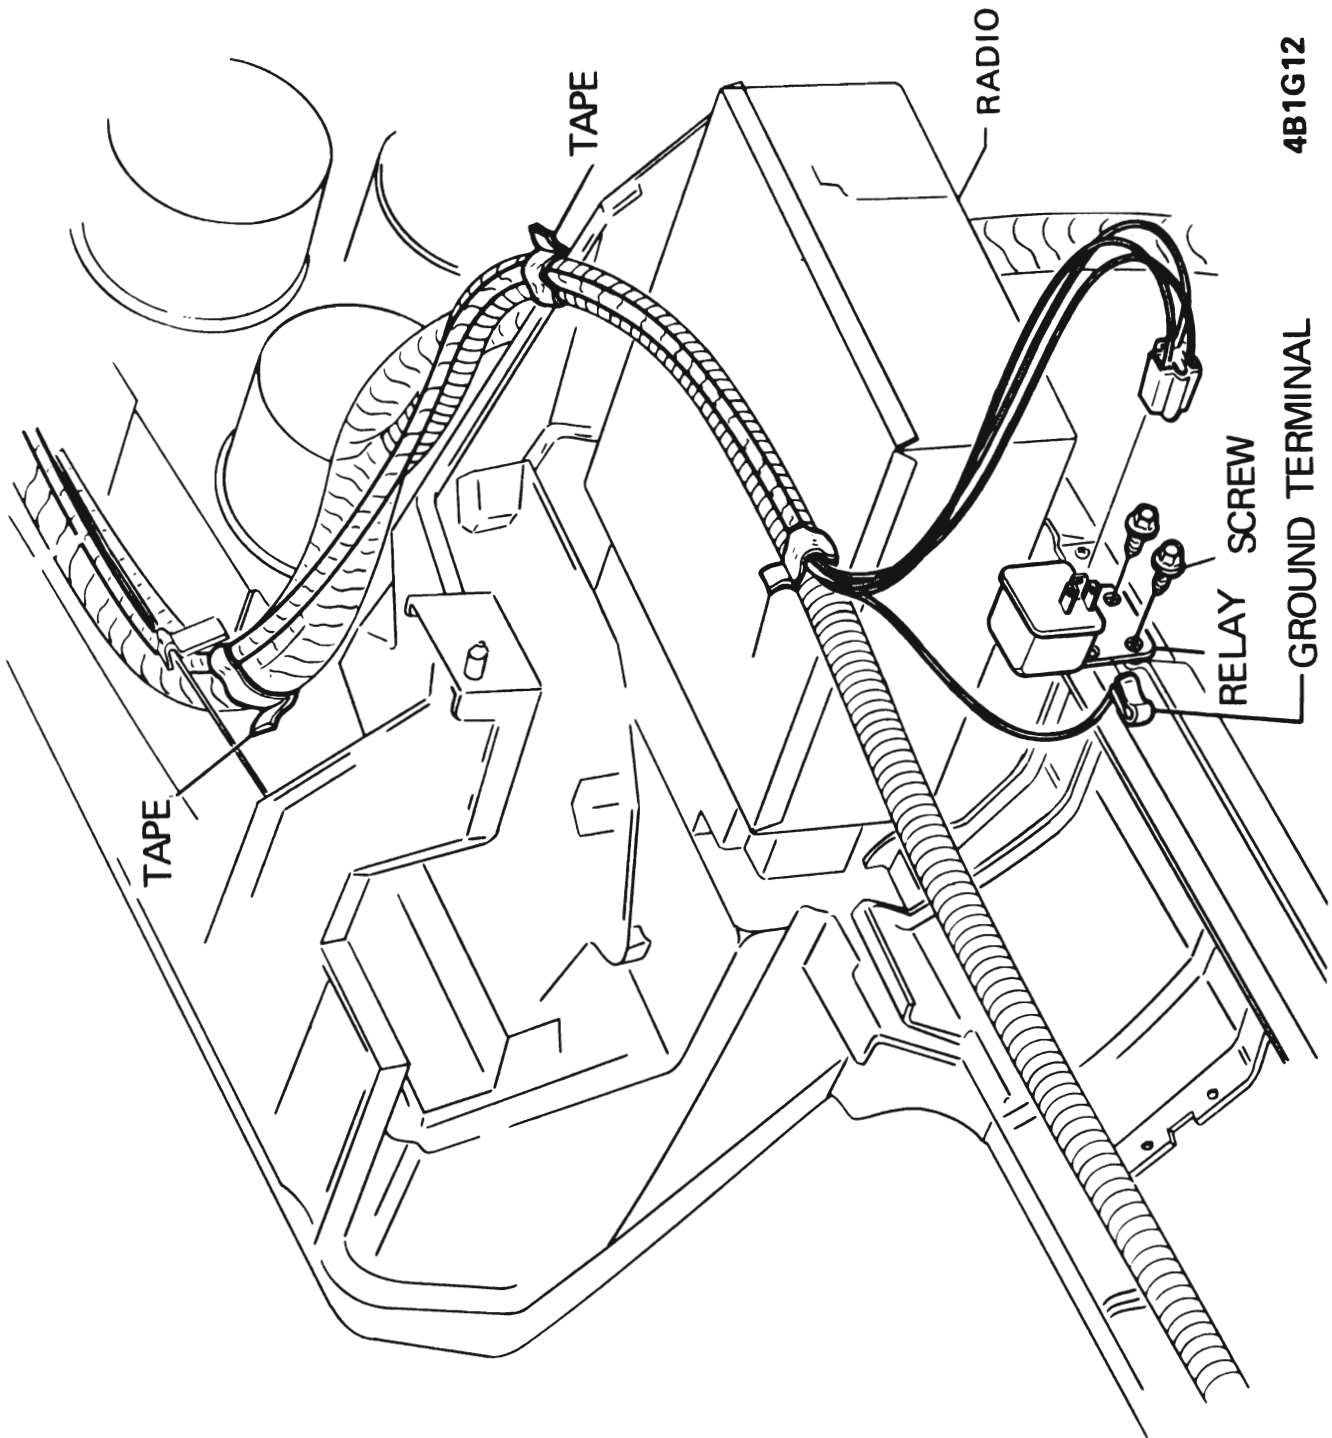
G-12 "A" Series Wiring Heated Glass Rear Defogger
